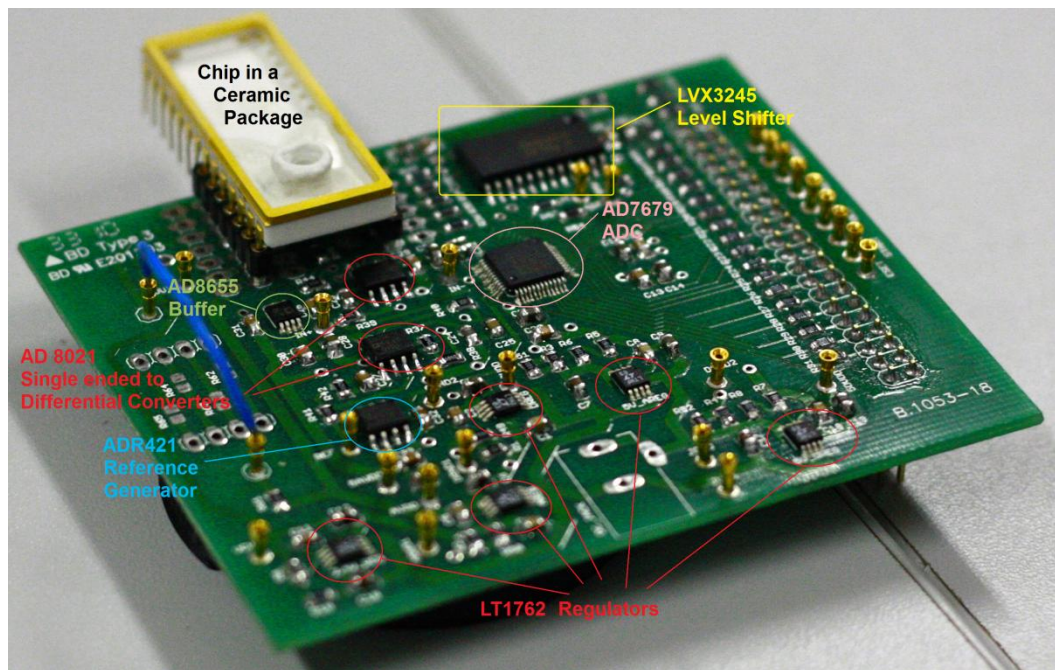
Designed external PCB with the components and a chip bonded to a ceramic package on top of it.
